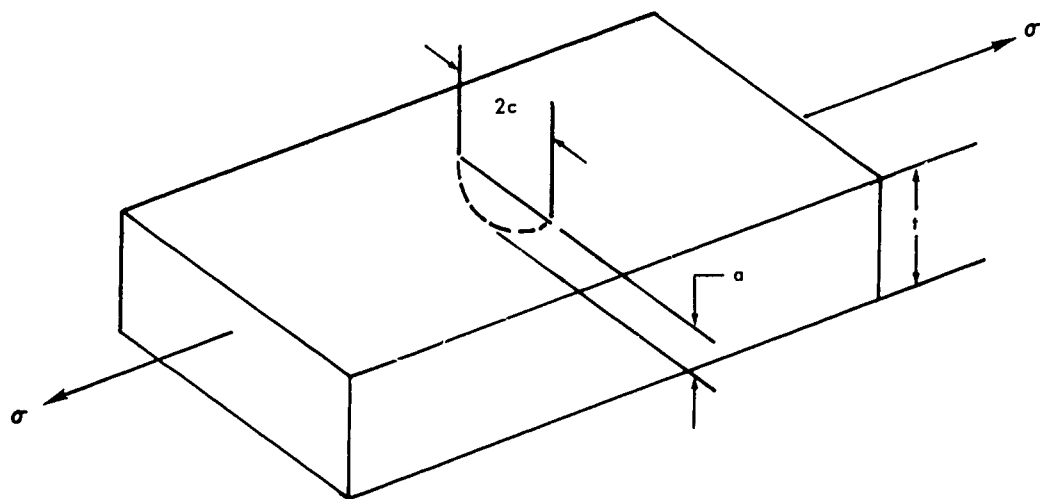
SURFACE FLAWED SPECIMEN CONFIGURATION
